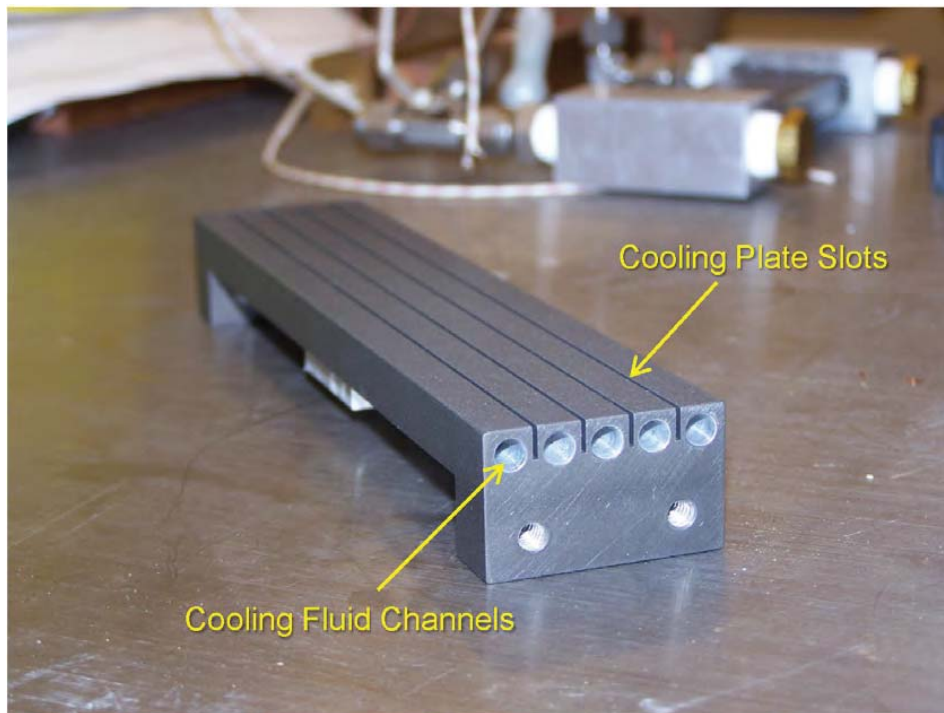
Cooling Passage Geometry for Anodized Aluminum Manifold
